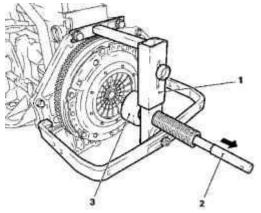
Installing slave drive and the hard plate: 1, 3 - a special device KM-6263-30, 2 - mandrel
